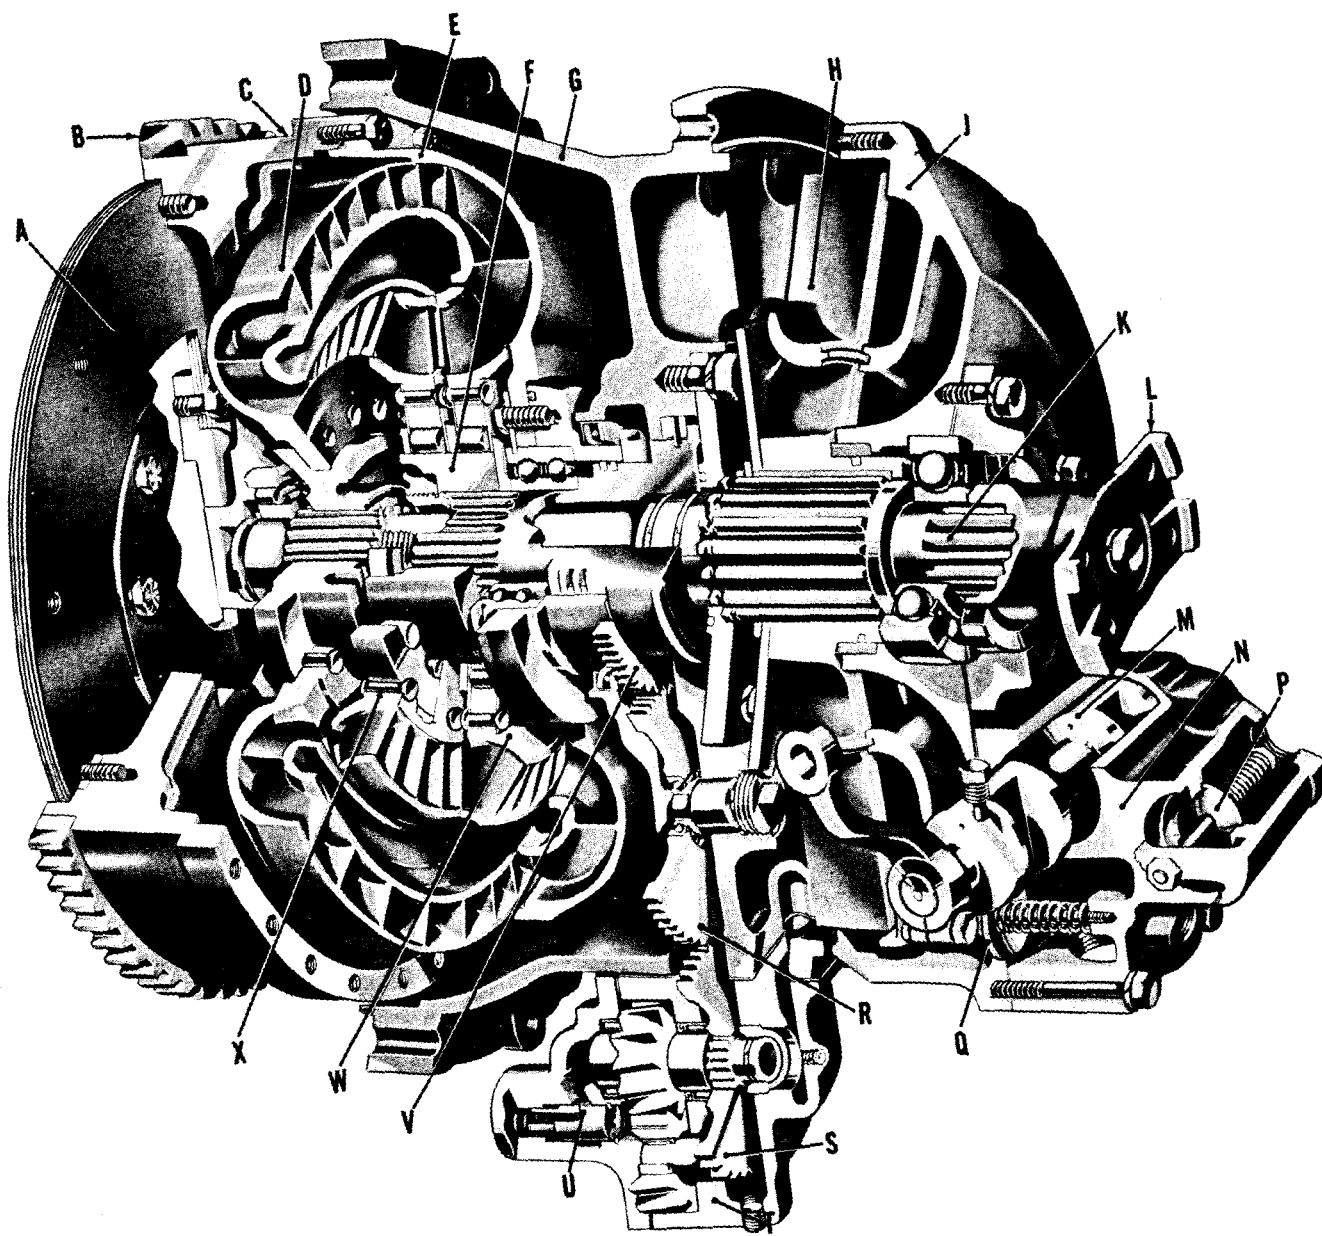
TCB Torqmatic converter retarder — cutaway view
